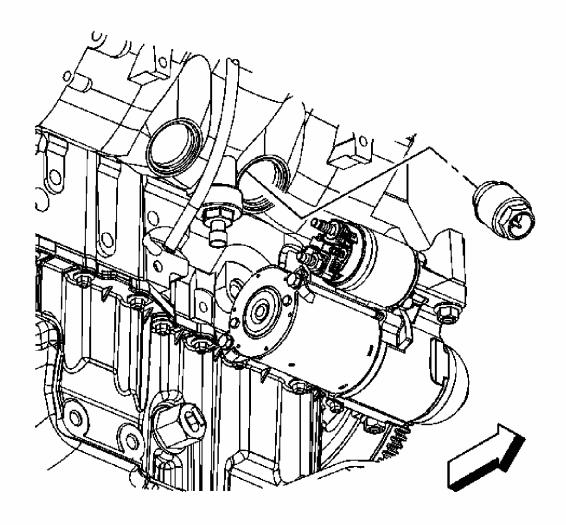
Locating Coolant Heater Courtesy of GENERAL MOTORS CORP.
